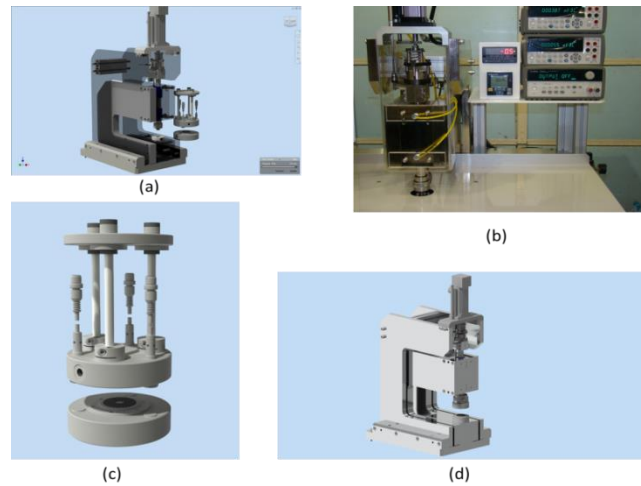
The schematic drawing and images of the three-in-one device for TUC/RUC/IPP measurements
